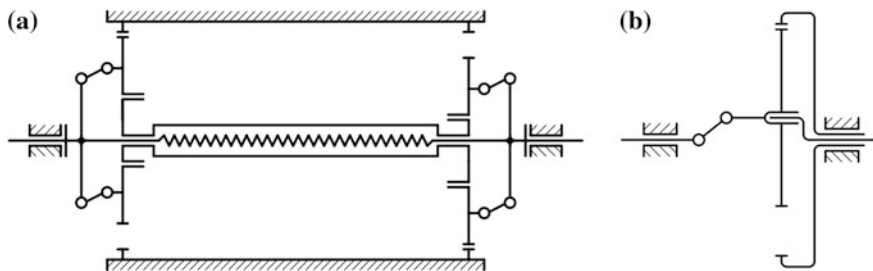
a Kinematics scheme of integrated gearbox. b Kinematics scheme of equivalent planetary differential gear
